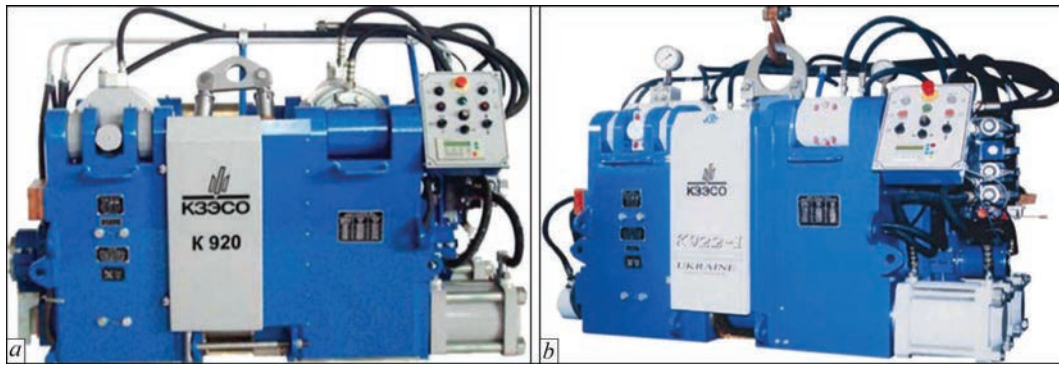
Mobile machines K920 (a) and K922-1 (b) for welding high-strength rails
